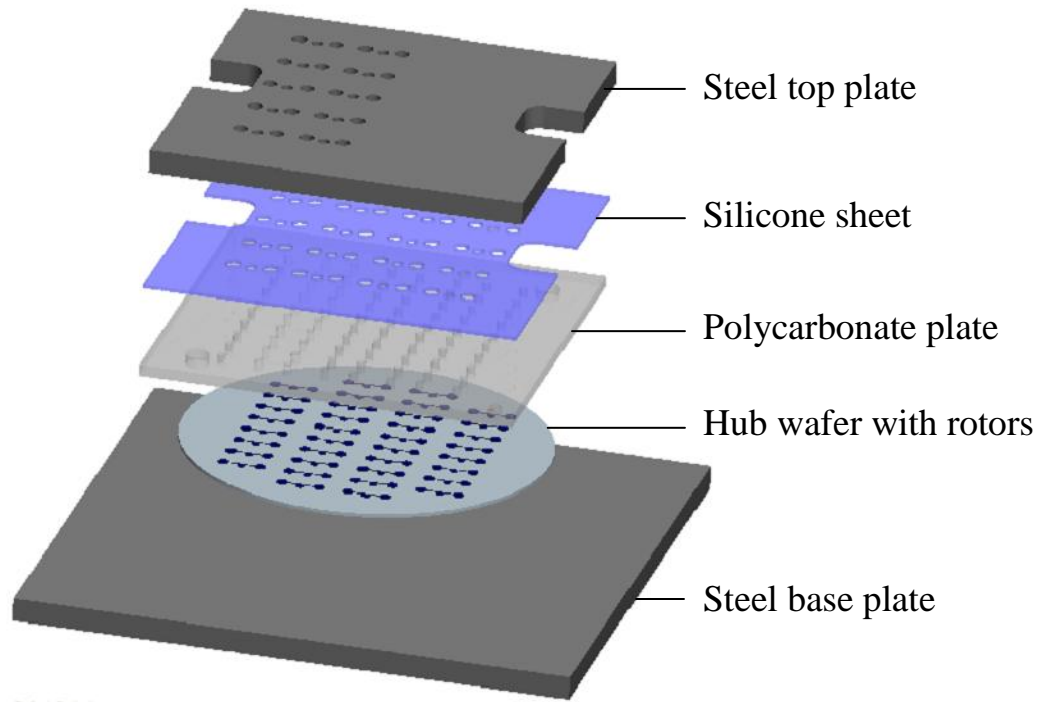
Exploded-view of Phase 2 microbearing test fixture.
